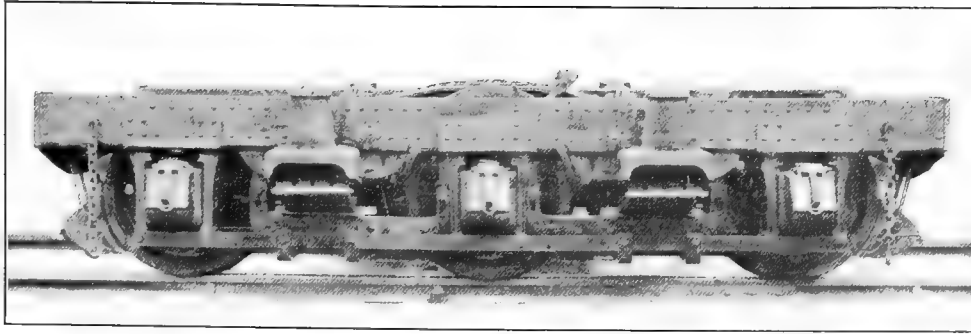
Six-Wheel Truck for Pennsylvania Railroad Steel Cars.
